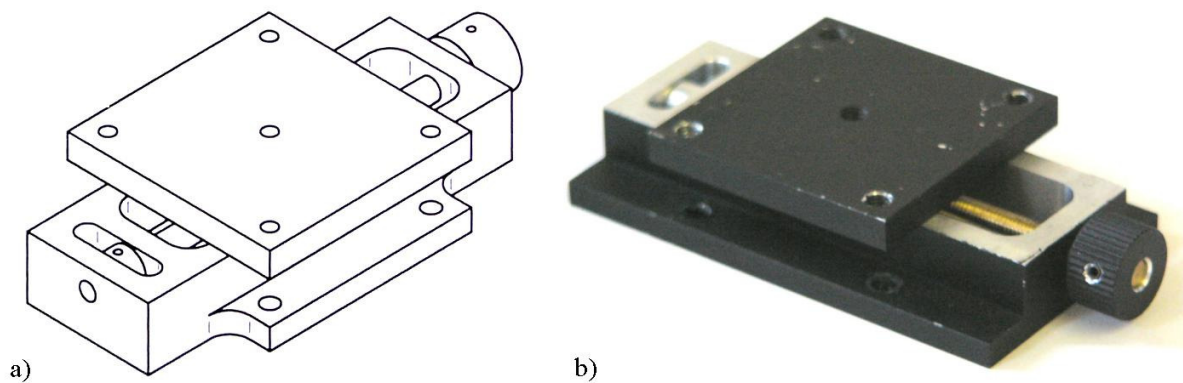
Precision mount a) Assembly drawing, b) Photograph
